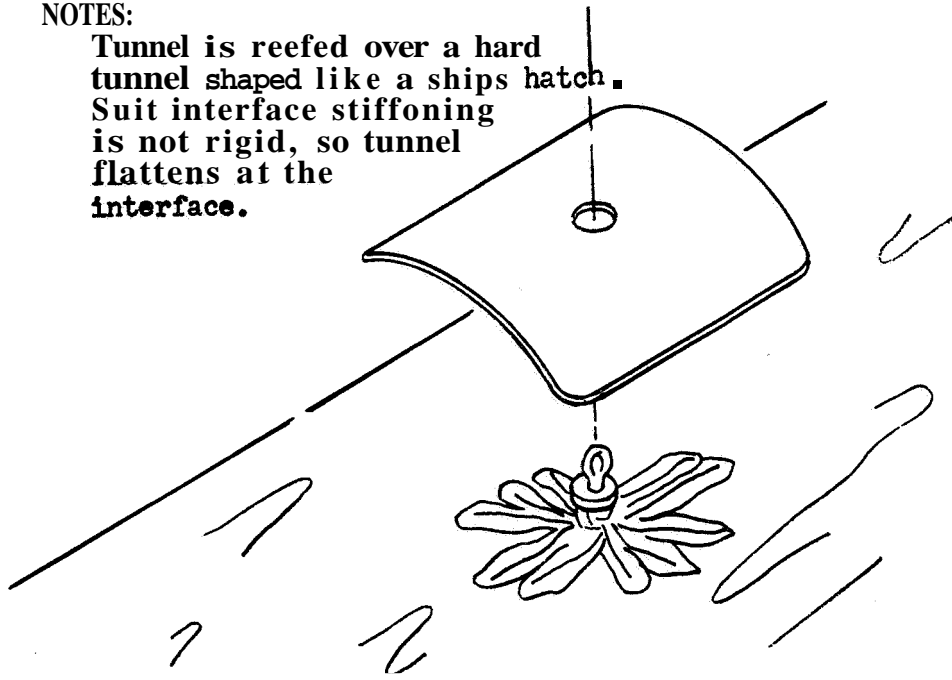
Tunnel and Detail of Swivel-Grommet Construction.
